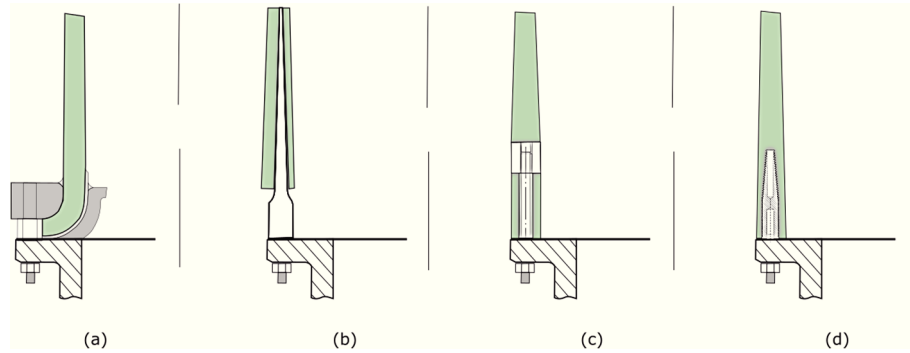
An overview of blade root joints. (a) Flange root connection. (b) Hub type root connection. (c) T-bolt root connection. (d) Stud root connection.
